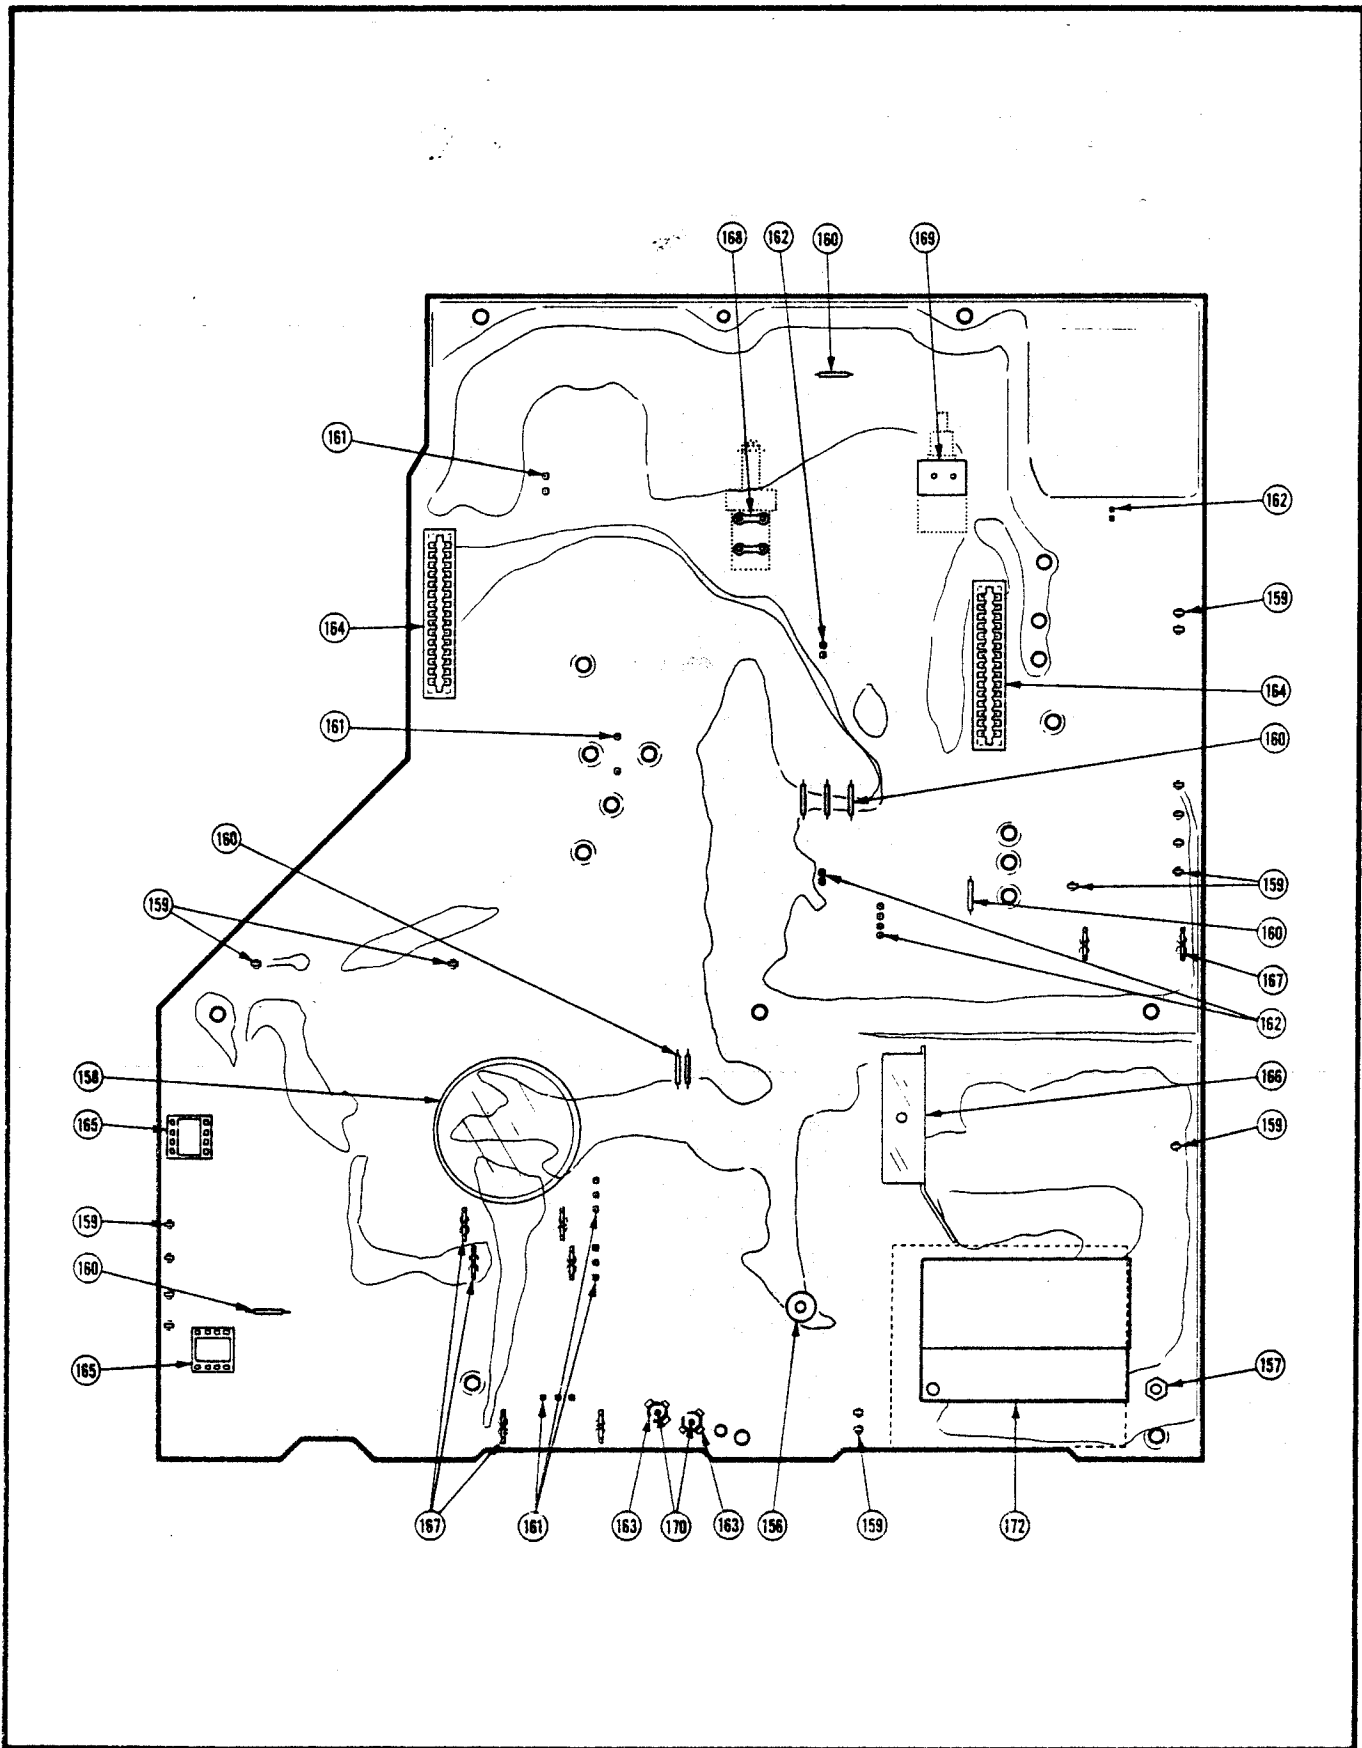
A11 Circuit Board Assembly, Interface (sheet 4 of 4).
